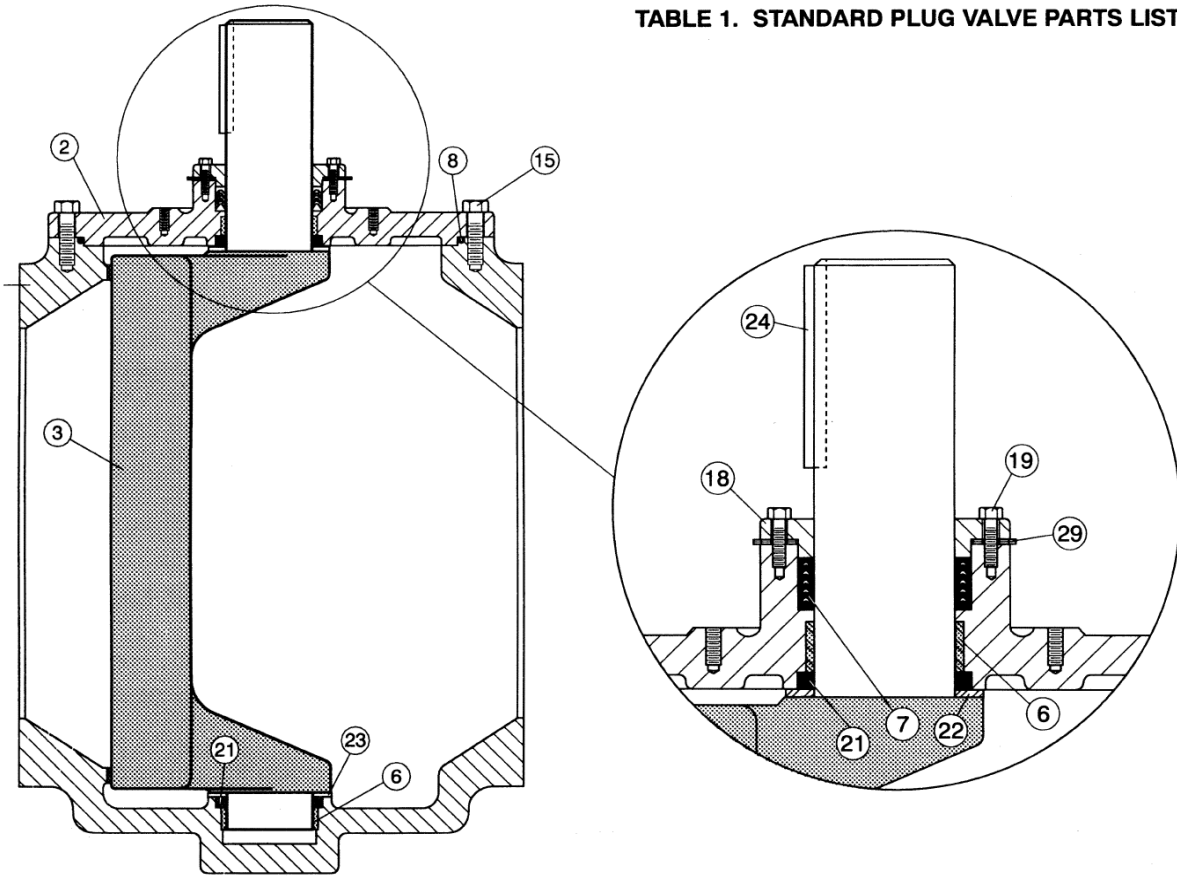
STANDARD PLUG VALVE CONSTRUCTION
